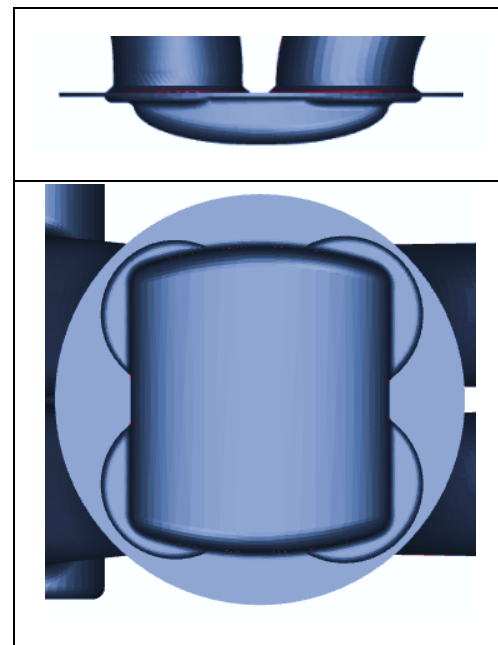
Combustion chamber views of the hydrogen 2S engine: side and bottom view.
